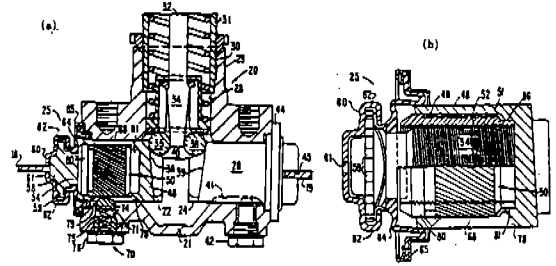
(a) A longitudinal cross-sectional view of an actuator, (b) An enlarged view of the plunger assembly(Lucas Industries)
